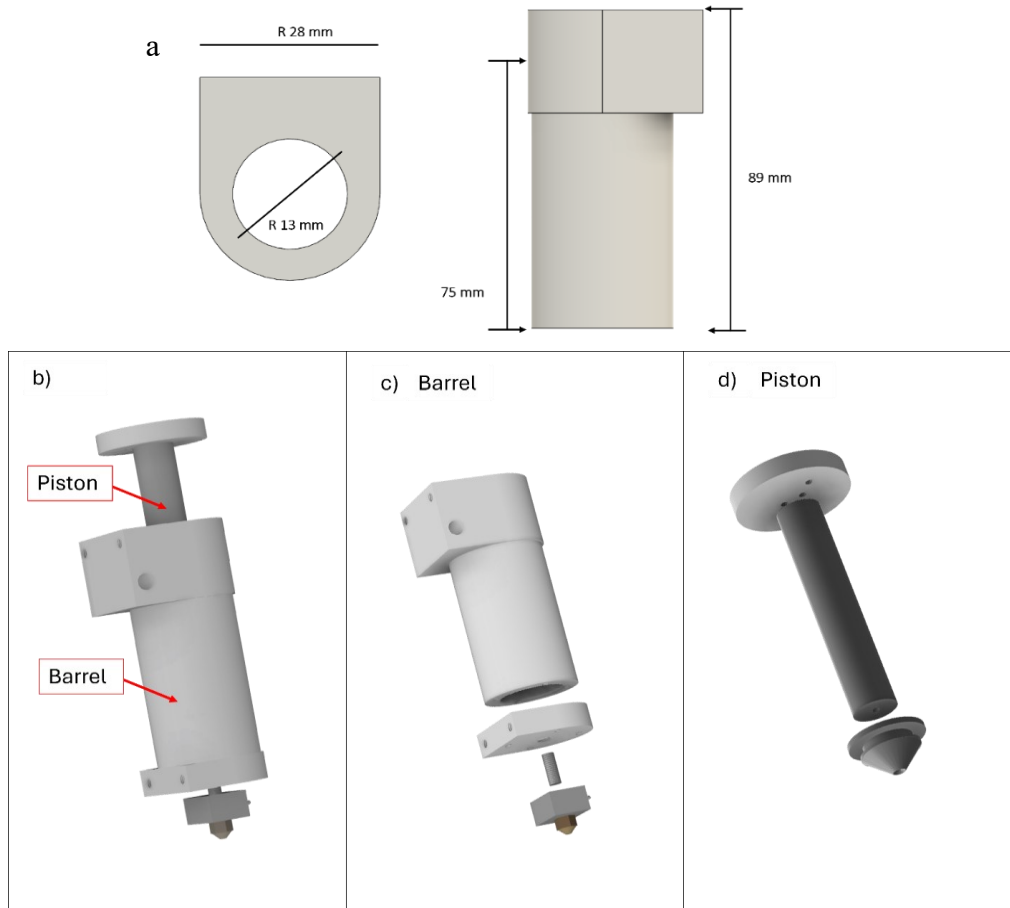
Custom-made hot metal syringe schema: a) geometrical dimensions of custom-made hot metal syringe b) assembled schema of the syringe, c) barrel exploded CAD, and d) piston exploded CAD.
